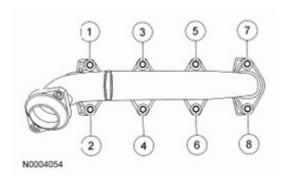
Identifying Tightening Sequence Of RH Exhaust Manifold Bolts Courtesy of FORD MOTOR CO.
